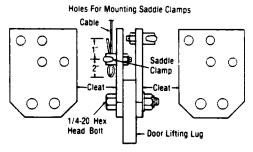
ATTACHING DOOR CABLE TO CLEATS.
